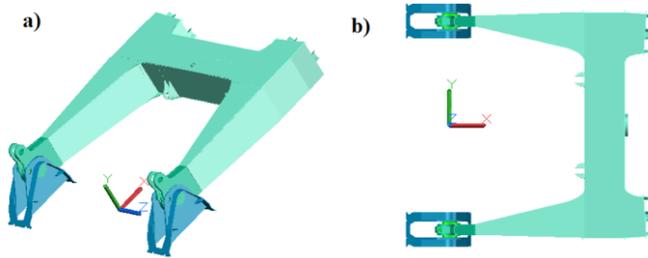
3D drawing of the head section a) Isometric view b) side view (color do not represent thickness here)
